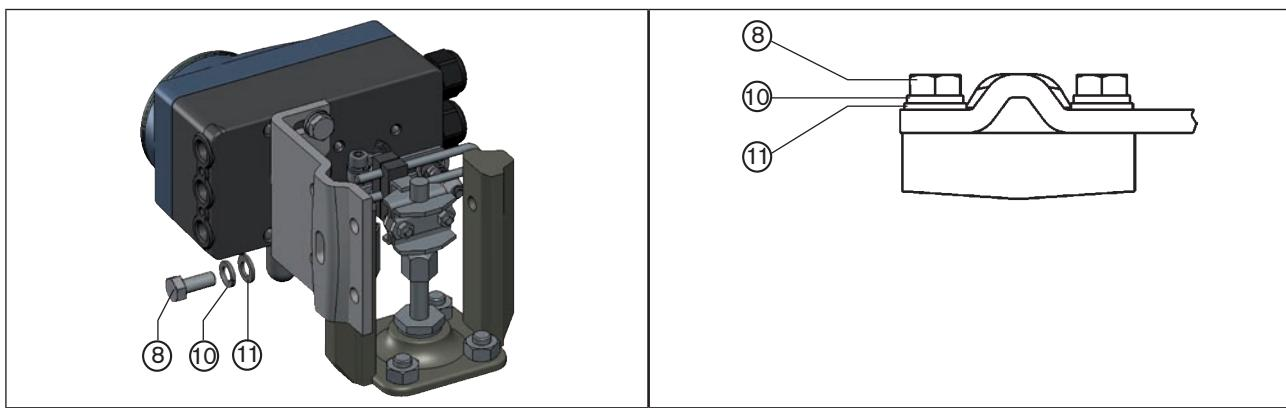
Attach positioner with mounting bracket; for actuators with cast frame
